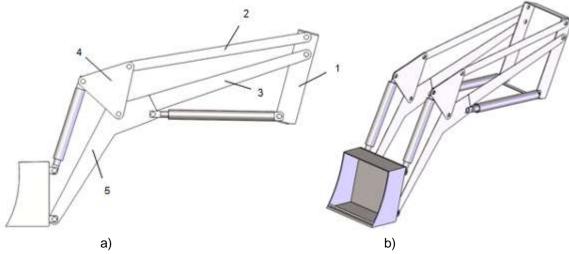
CAD model of the bucket drive mechanism: a) lateral view; b) isometric view; 1- Support ; 2- Plate 1; 3- Plate 2; 4- Plate 3; 5- Back boom
